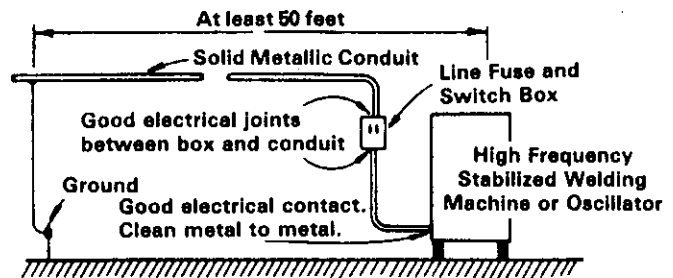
Power Service Installation H.F. Stabilized Arc Welding Machine
